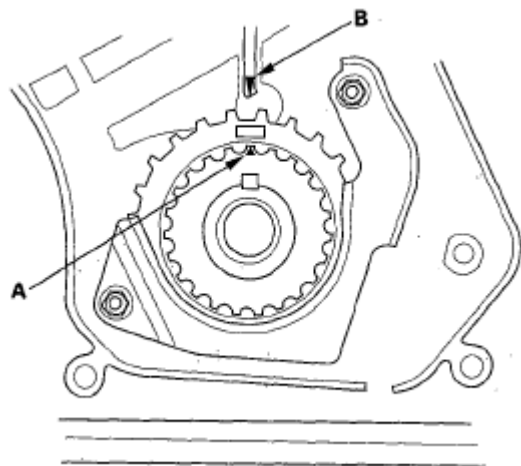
Identifying TDC Mark On Tooth Of Timing Belt Drive Pulley With Oil Pump
